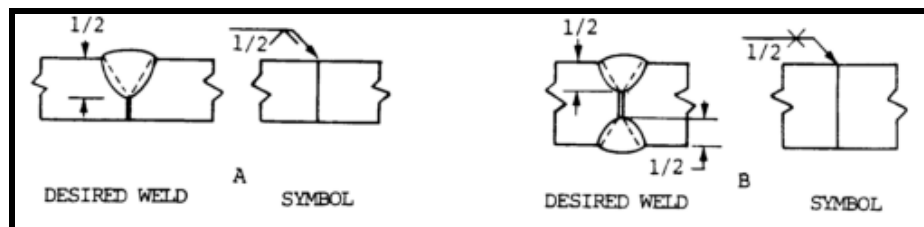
Groove welds dimensions for welds extending partly through the members joined.
